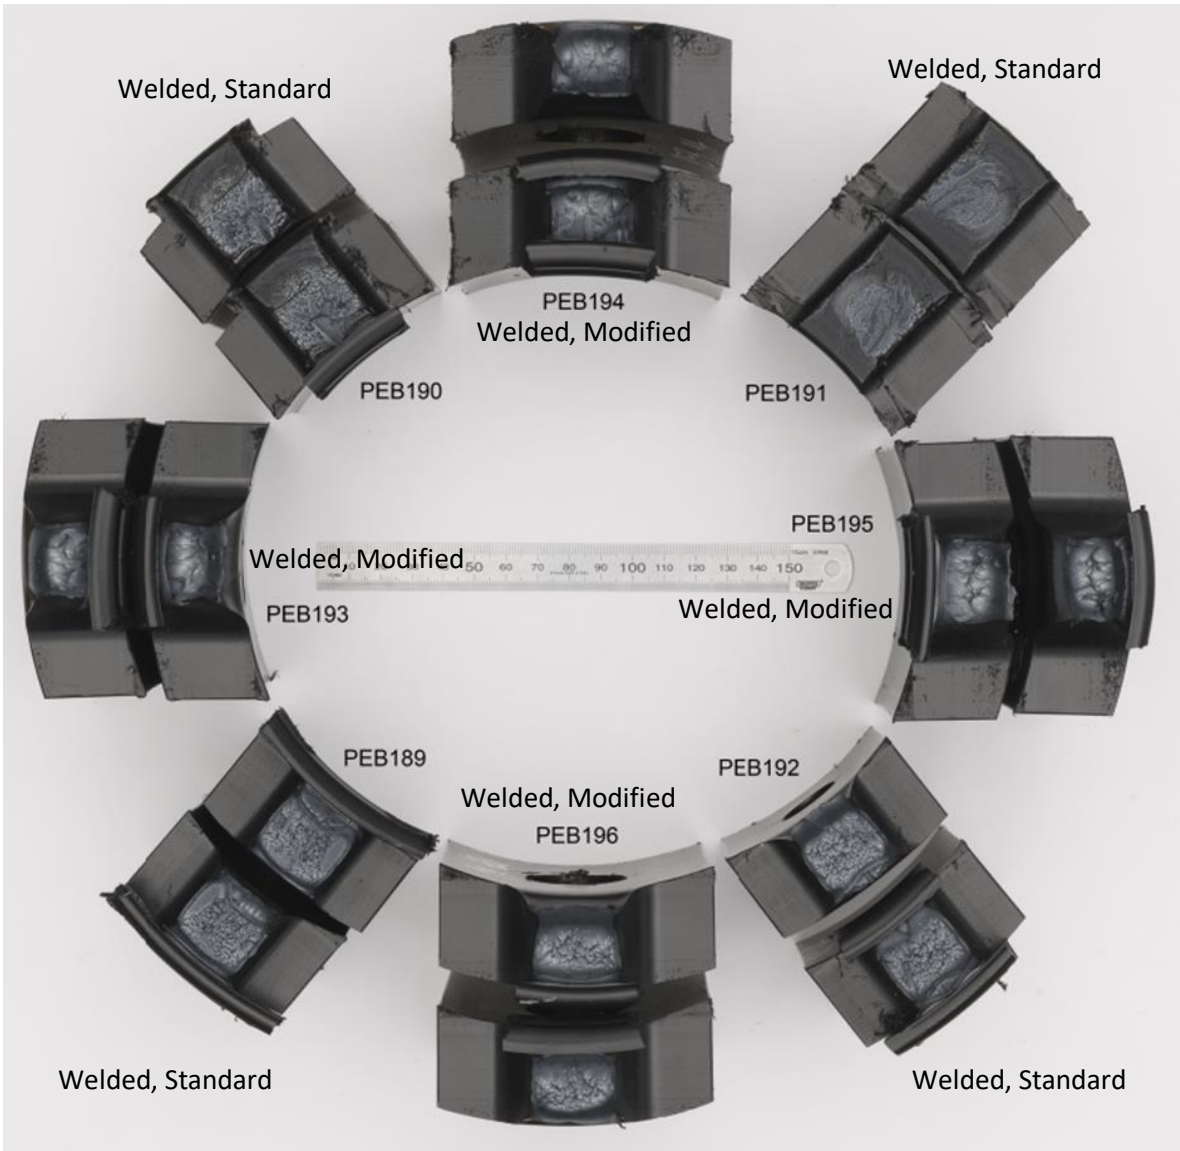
, Fracture surface for welded 280mm OD pipe using standard and modified geometry
